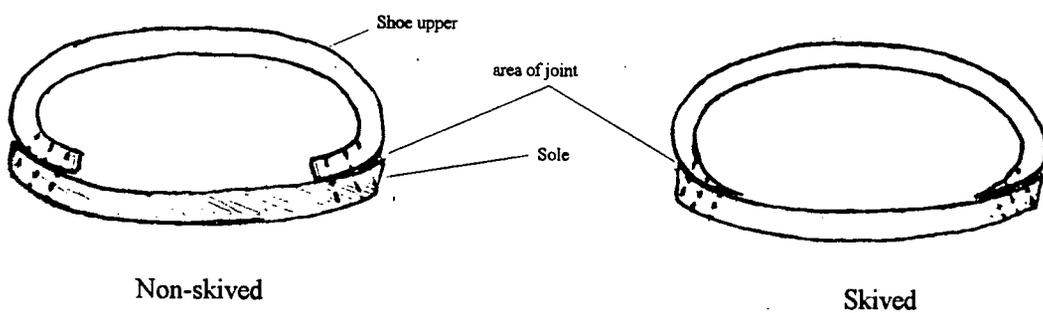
The necessity for skiving in footwear upper assembly.
